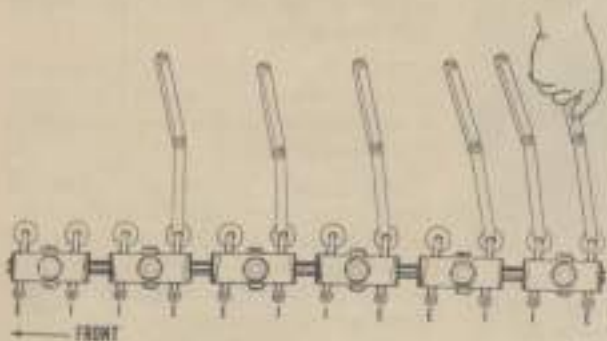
A — D-17 diesel. With number 6 piston at TDC on compression stroke, valve clearances (trapper gap) can be set on the six valves indicated. Refer also to Fig. 34.
